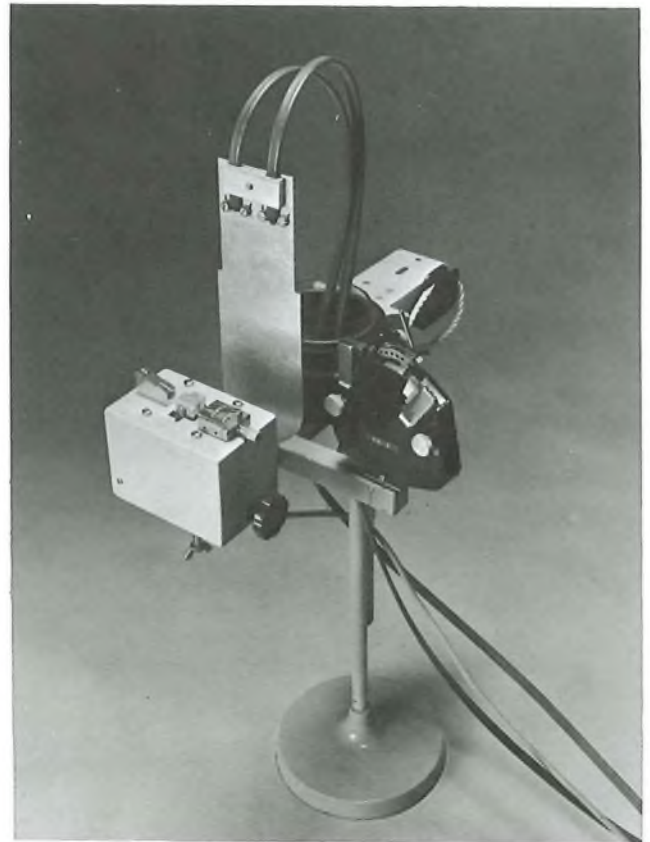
Jig, supporting fibre-breaking tool and jointing machine
